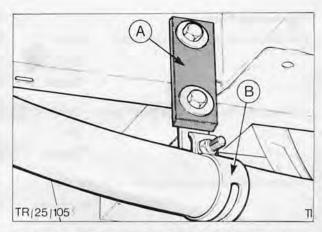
Rear support of rear tail pipe (OHV/Diesel variant illustrated)
